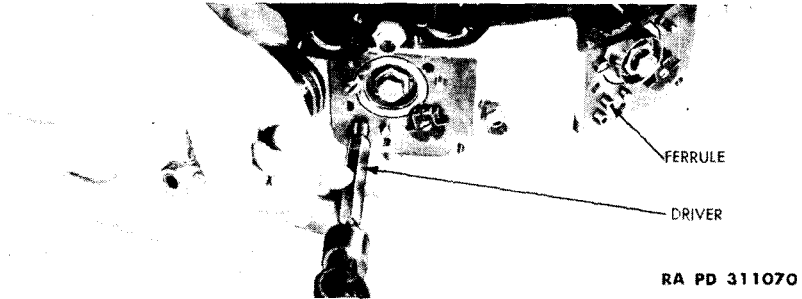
Installing Crankcase Ferrule, Using Driver 5A2161
